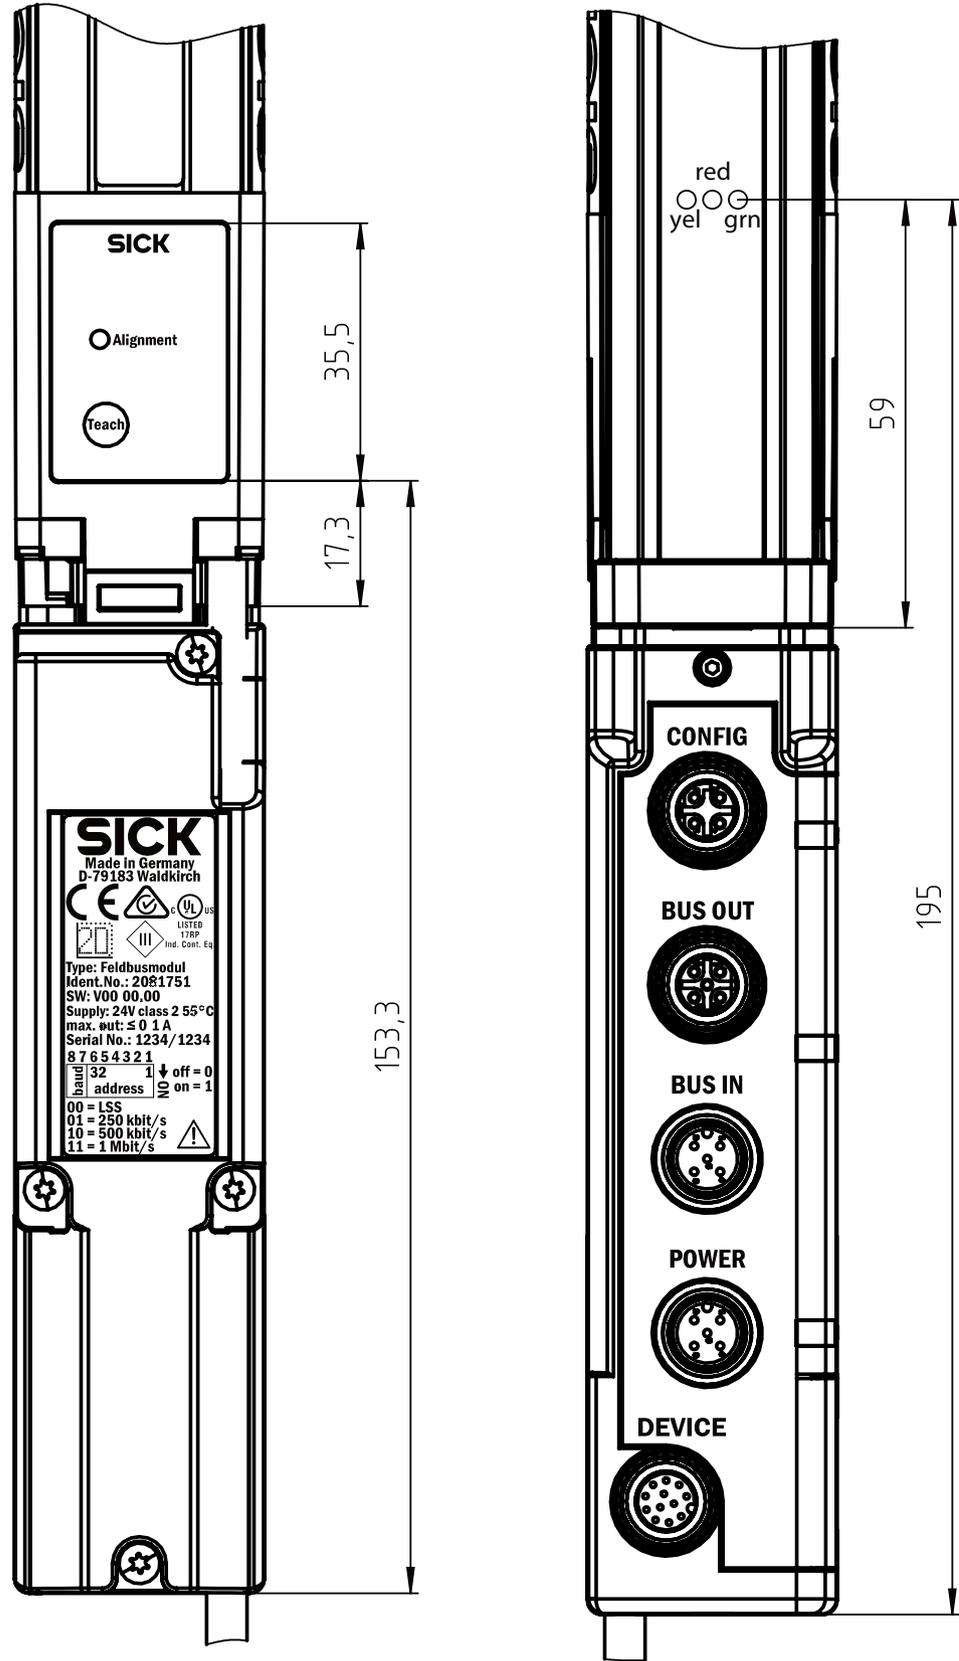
Dimensional drawing 1 MLG-2 fieldbus module
